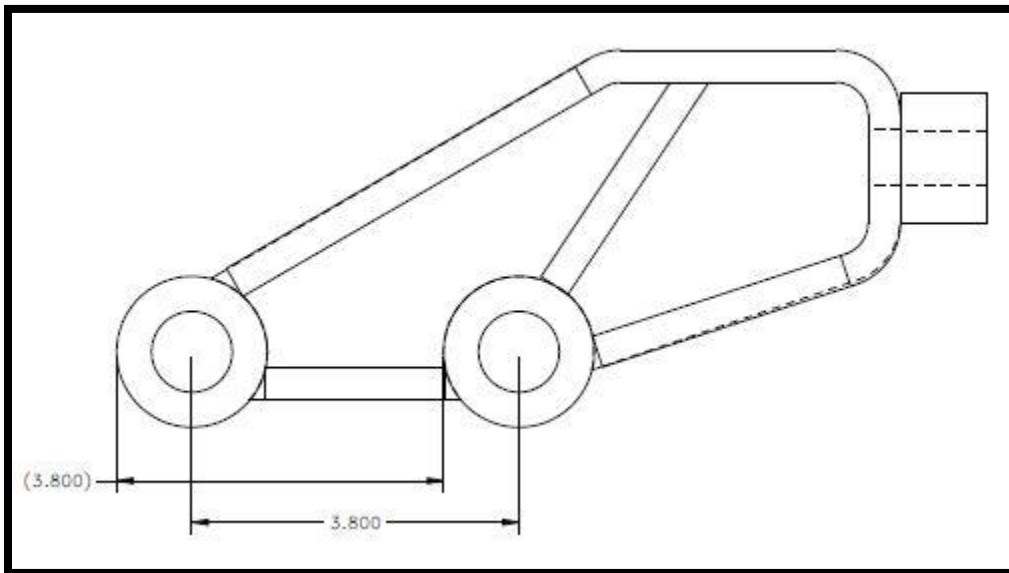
Correct hole spacing dimension, in inches. The spacing can either be measured center to center or tangent edge to tangent edge of the holes (as shown by the dimension in parentheses).
